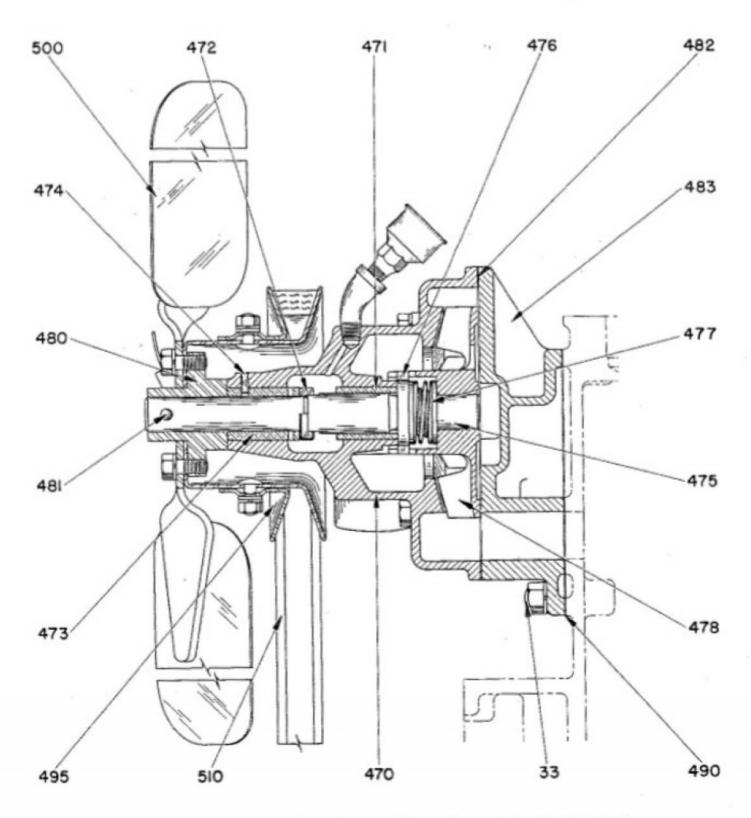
Cross Section through Water Pump (Up to Serial No. 165842)
